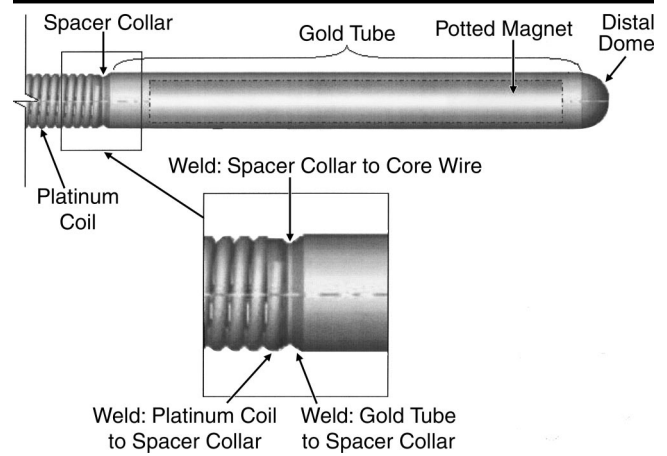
Diagram of guide wire tip configuration. A gold tube is welded to the distal paddle of the wire core, forming the distal tip and marker. A spacer collar is located between the platinum coil and the gold tube. Within the gold tube, a single 2-mm-long neodymium iron boron magnet is encased or potted. The distal tip is rounded to minimize trauma to the surrounding tissue during navigation.
